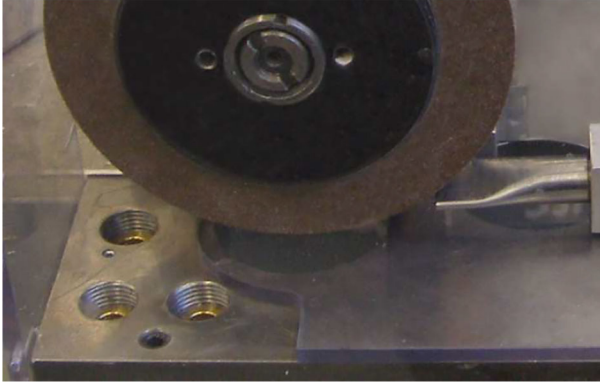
A simulated grinding setup with a narrow gap between the clockwise-rotating grinding wheel and flat perspex workpiece. Grinding fluid is ejected from the nozzle on the right-hand side towards the gap underneath the grinding wheel
